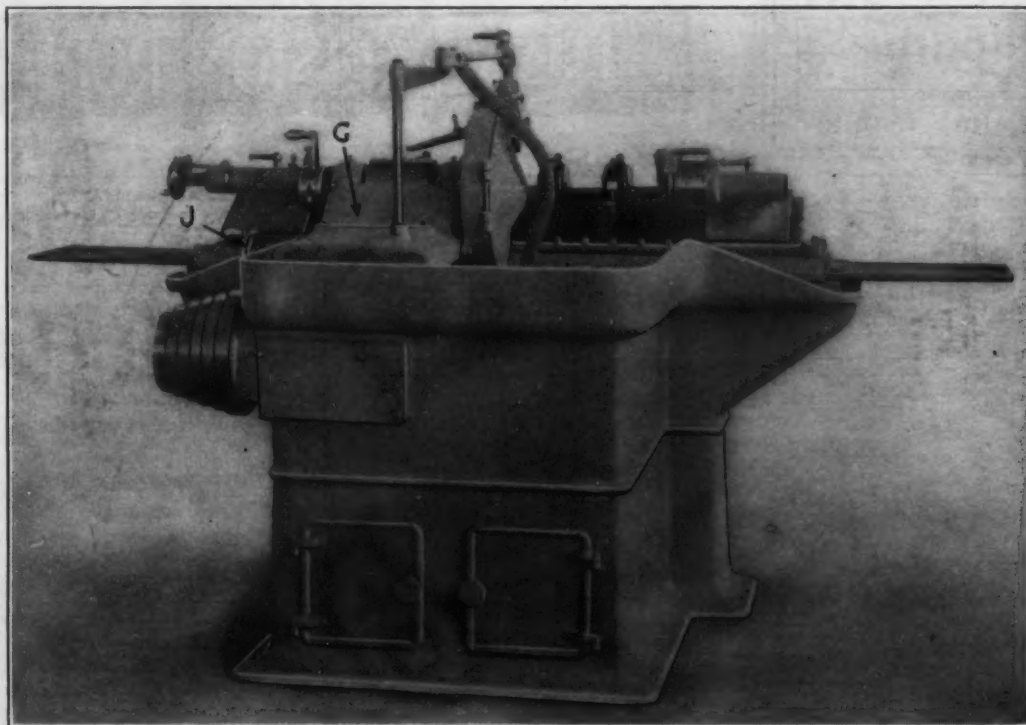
Rear View of the No. 12 Brown & Sharpe Plain Grinder.
